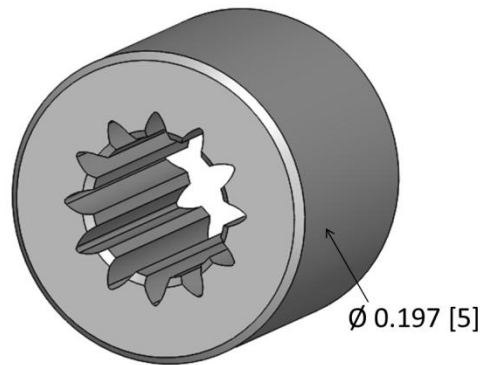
The spin gear insert will be bonded into the interior of the spin mass using epoxy and will serve as the coupling between the spin motor and the spin mass. The gear profile has been designed to match the pinion on the end of the spin motor. Dimensions are in inches [millimeters].
